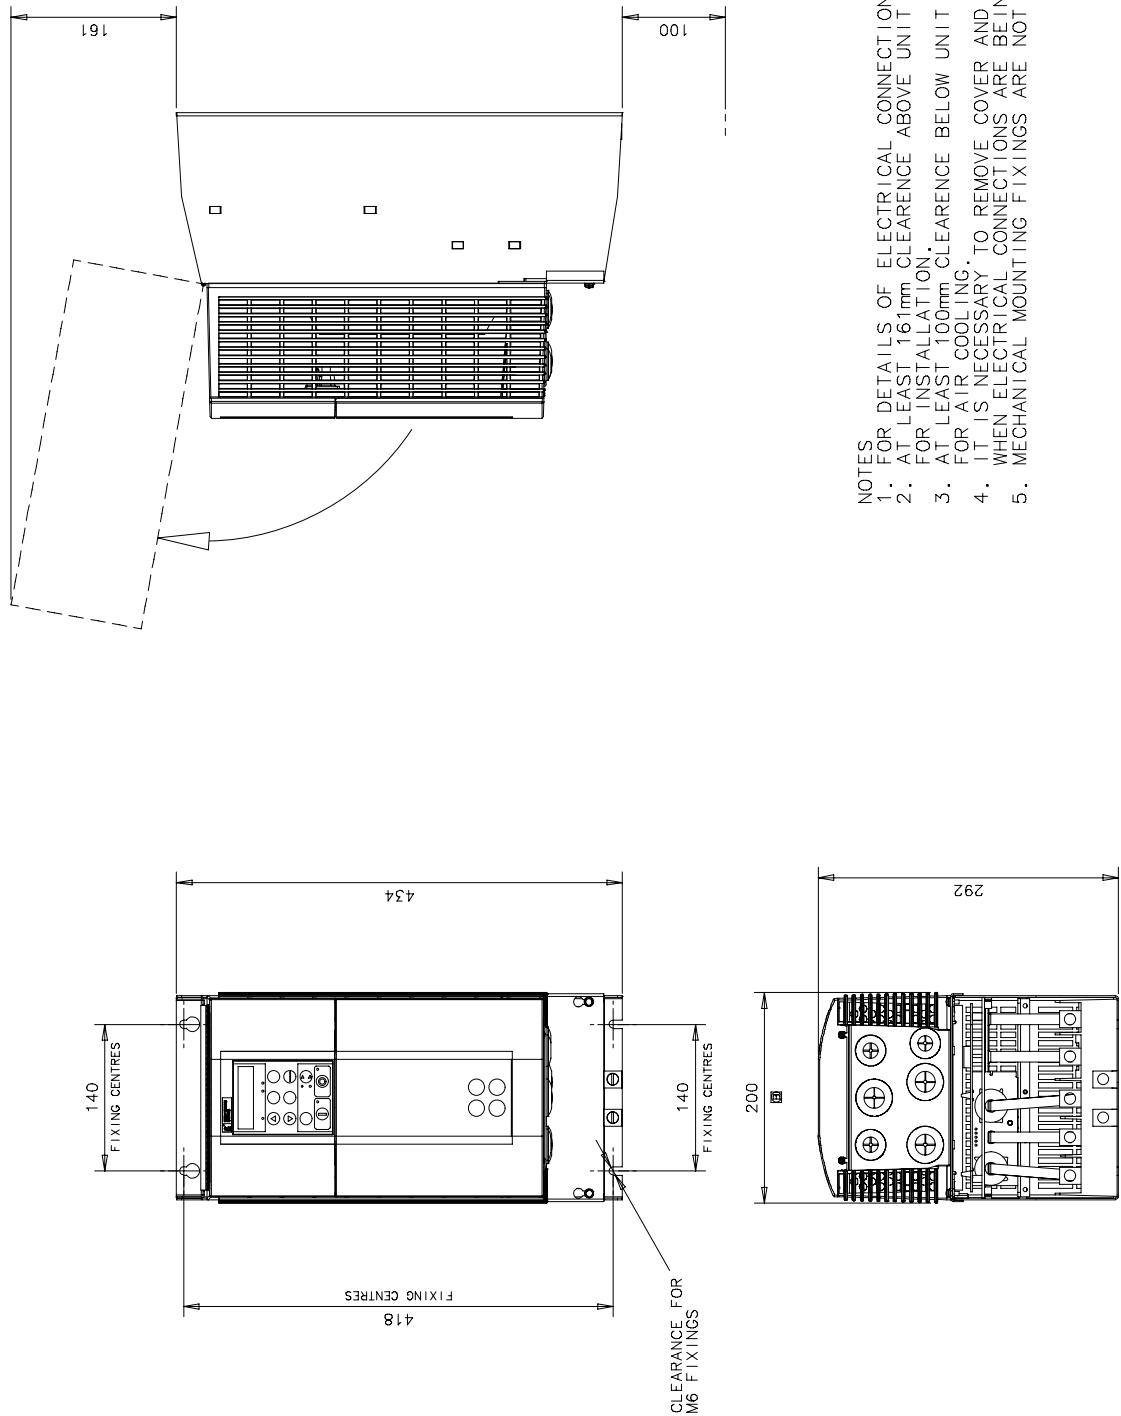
Frame 2 : 40A-165A Stack Assembly
